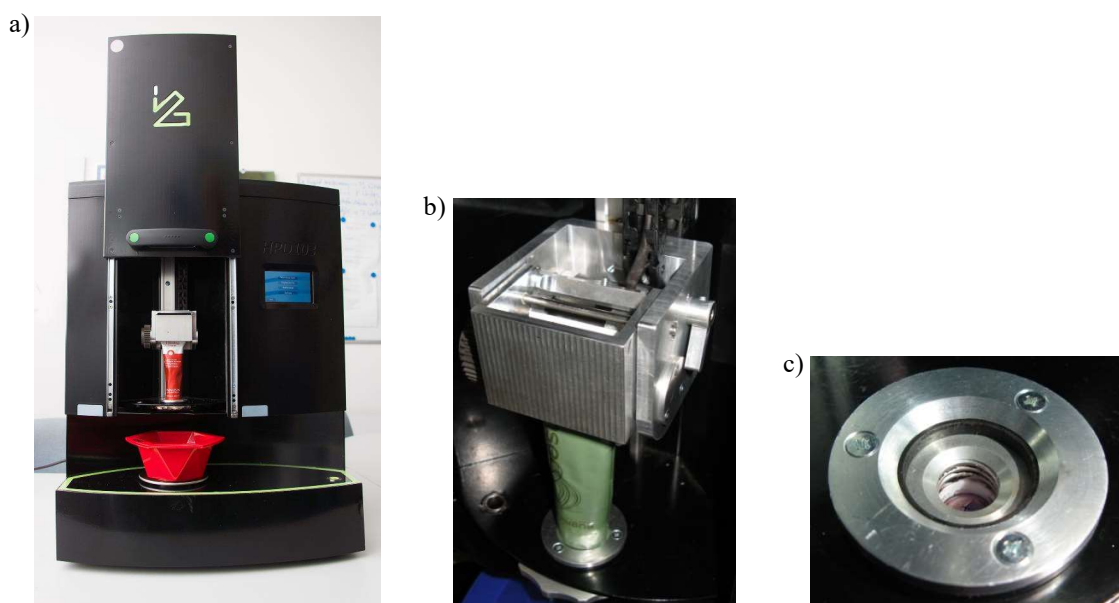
Prototype of the in-salon hair dye dispenser: a) prototype, b) squeezing module with cam clamping roller mechanism, c) elastic cut-off valve (at the bottom of the socket)
